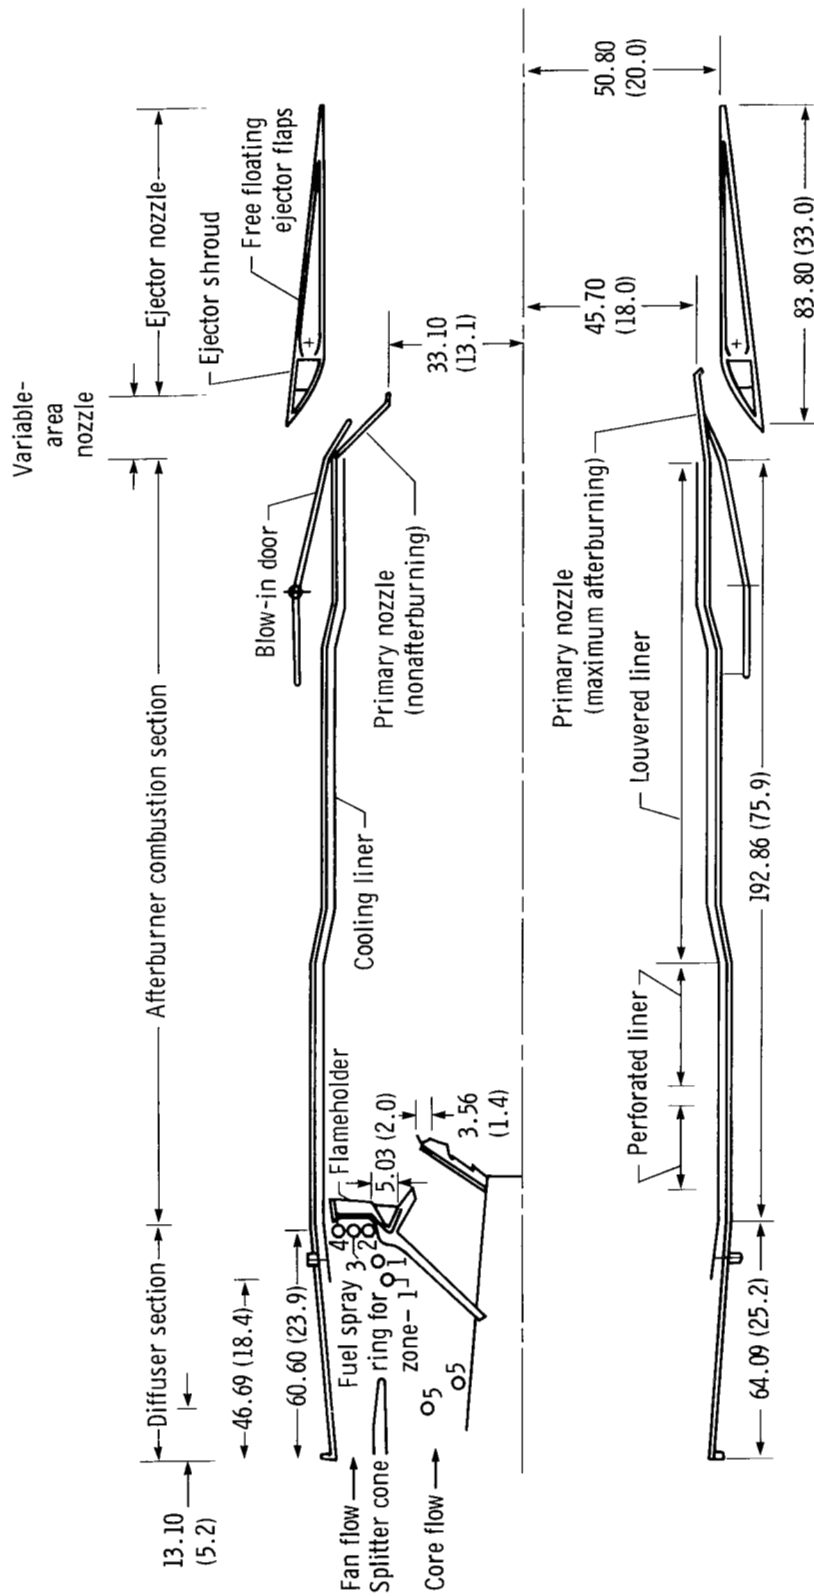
Engine afterburner and nozzle. All dimensions in centimeters (inches).
